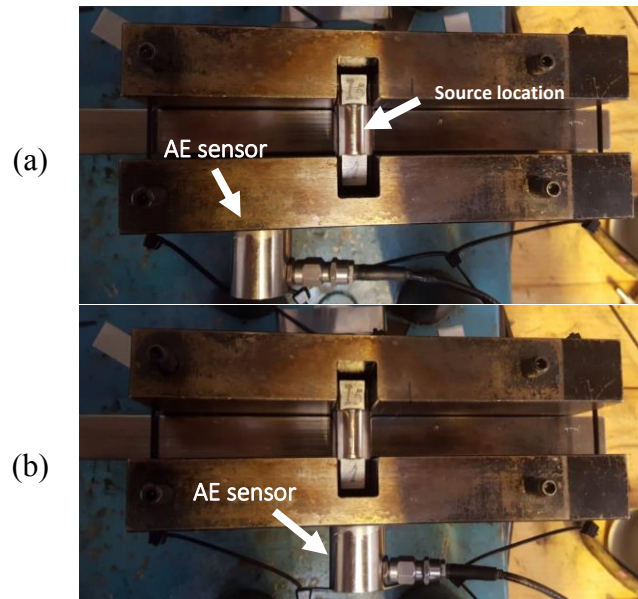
Sensor positioning for the pencil lead breaking test. (a) Position 1: 32mm from the center of the tool pin. (b) Position 2: At the center of the tool pin.
